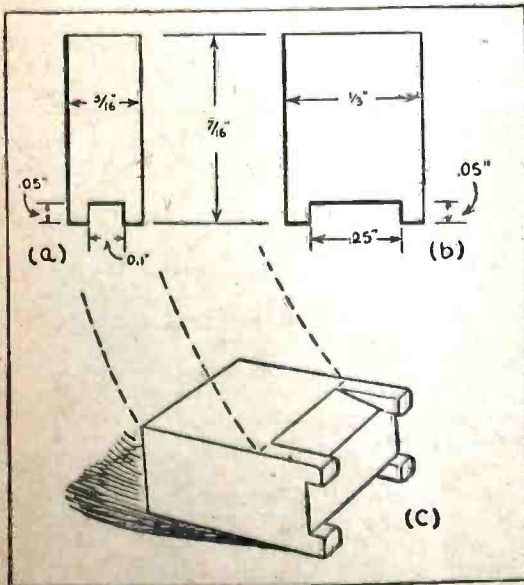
Details of the pole pieces. These may be modified to suit available magnets.
